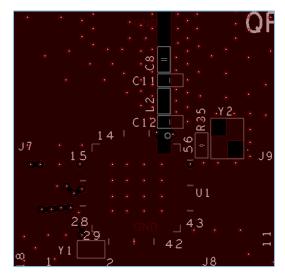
Layer 2 design for 4-layer PCB (QFN56)
